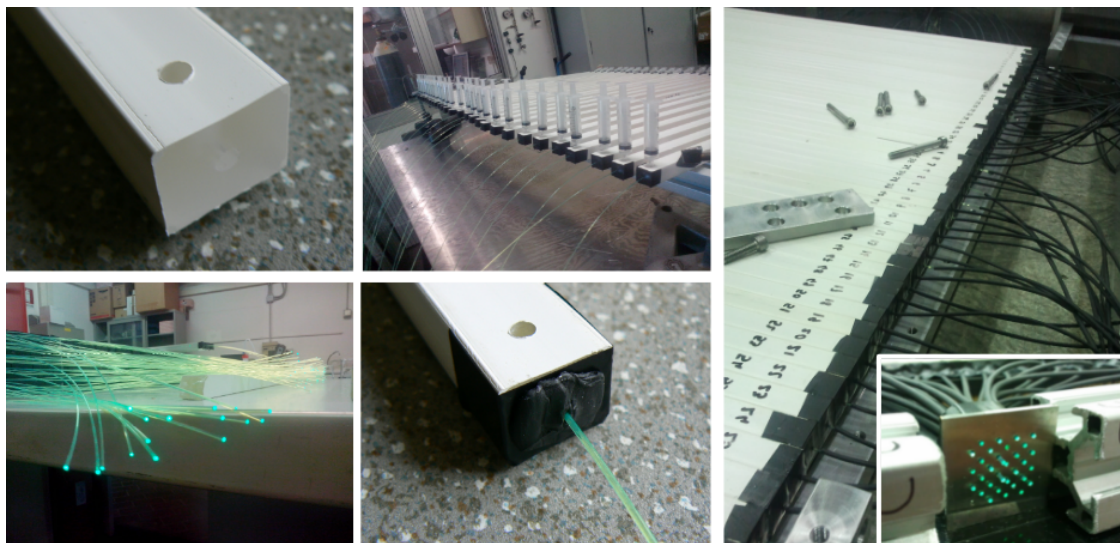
Illustration of how a detector single panel is composed: a scintillating bar is shown before and after gluing a WLS fiber inside (the hole used to pour in the glue through syringes is visible). The final assembly is shown on the right side of the collage, including the aluminum mask used to readout the fiber with a multi-anode PMT.
